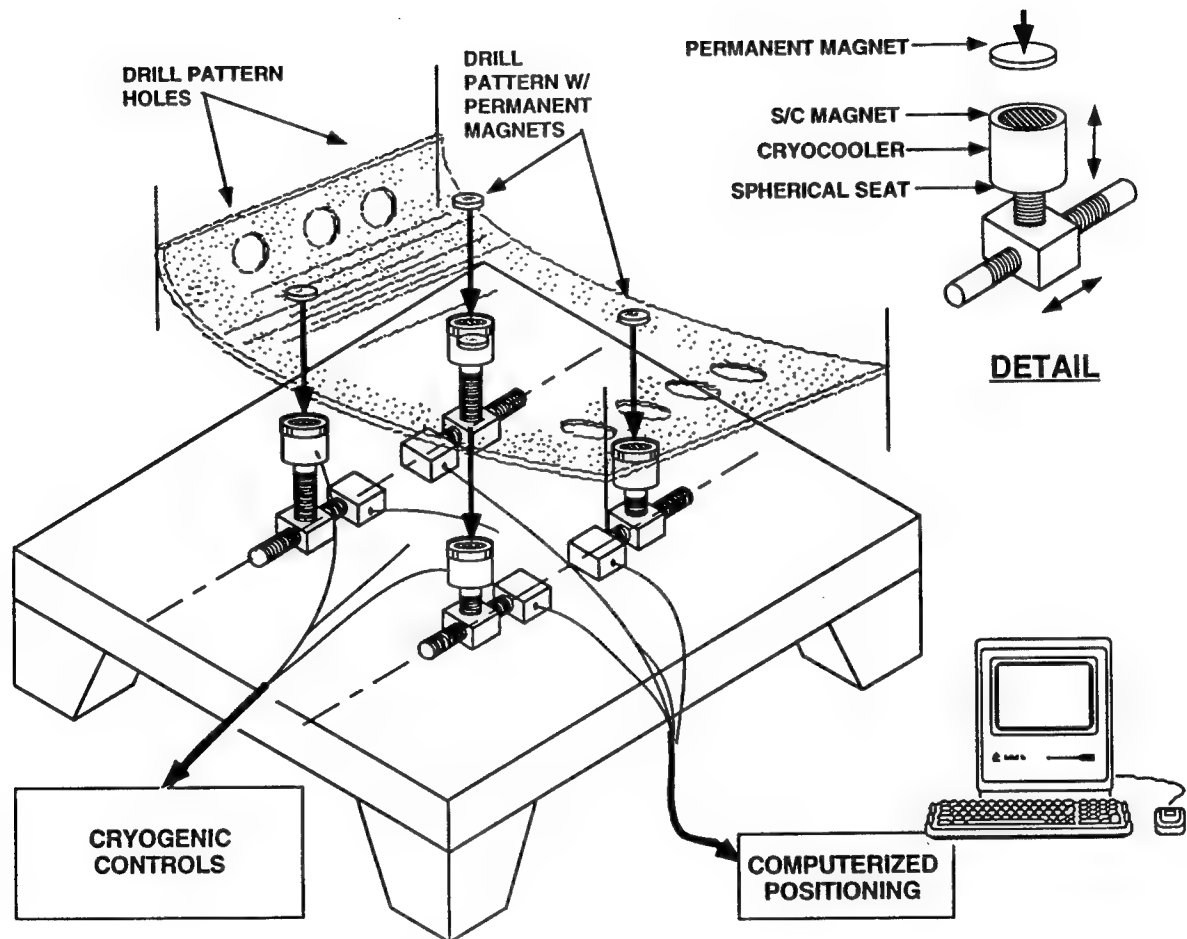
Adaptive superconductor clamp array shown clamping a different shaped part.
